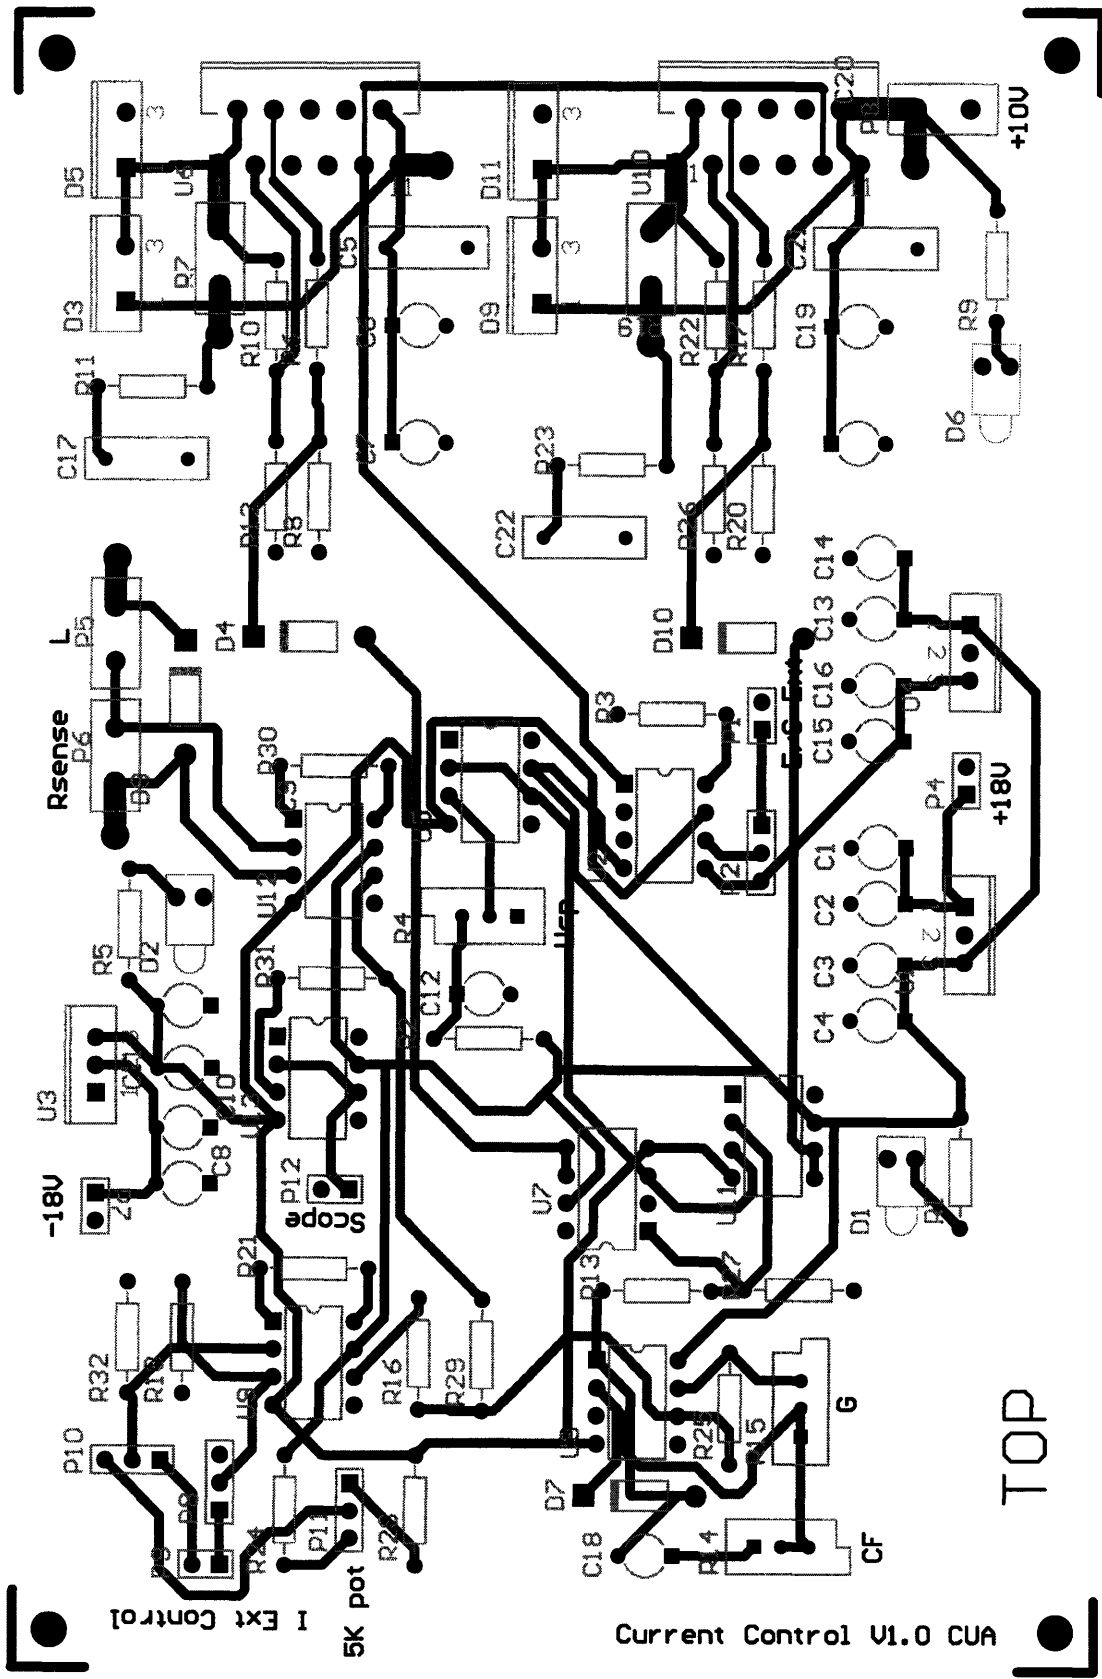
Printed circuit board layout for the MOT or shift coil current controller.
